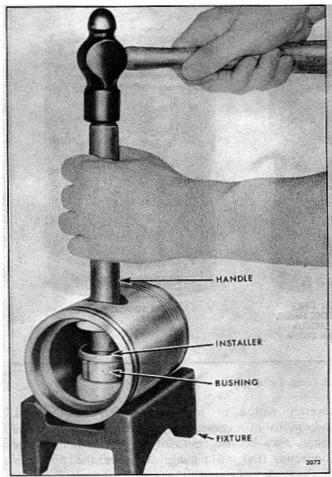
Removing or Installing Piston Pin Bushings in Piston
